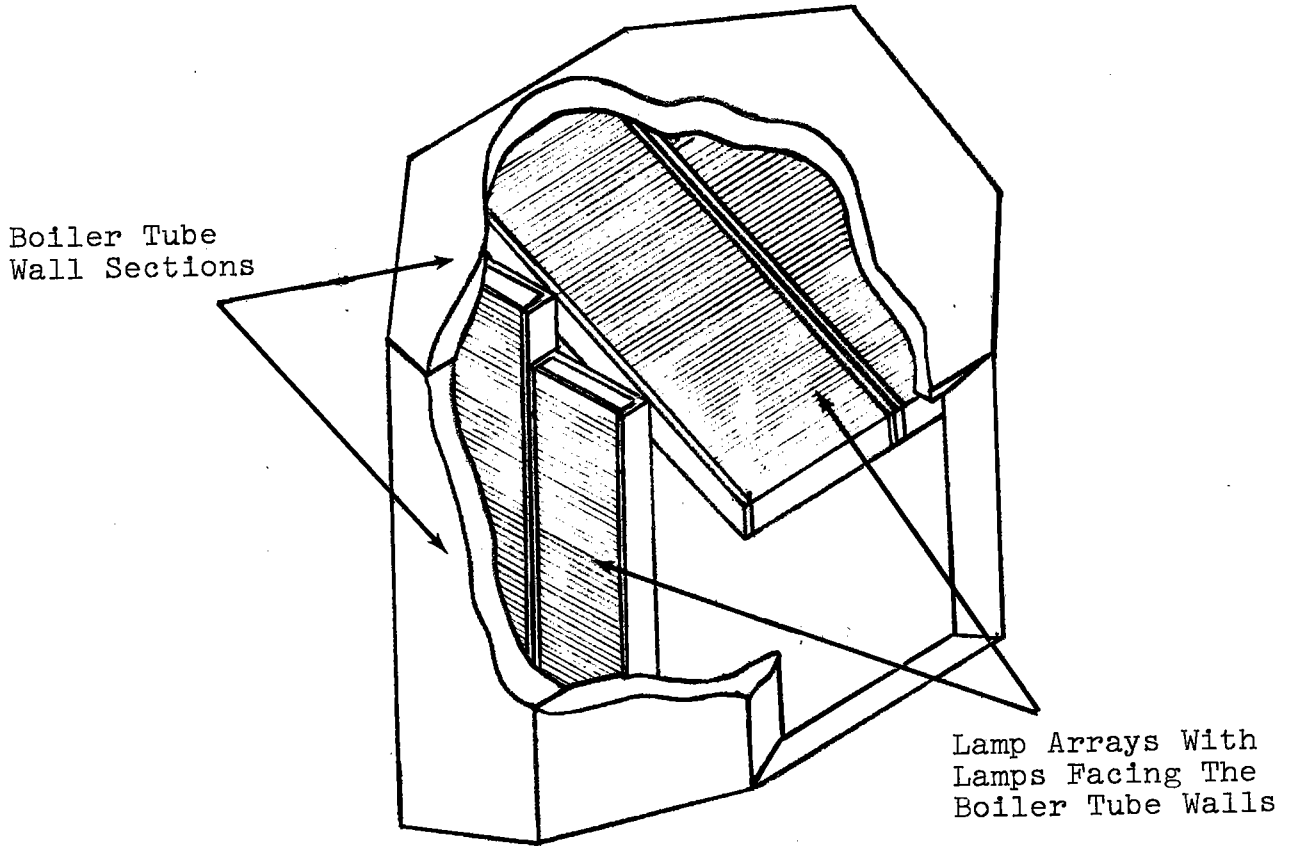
Possible Configuration for Lamp Arrays Built Inside the Boiler Assembly
